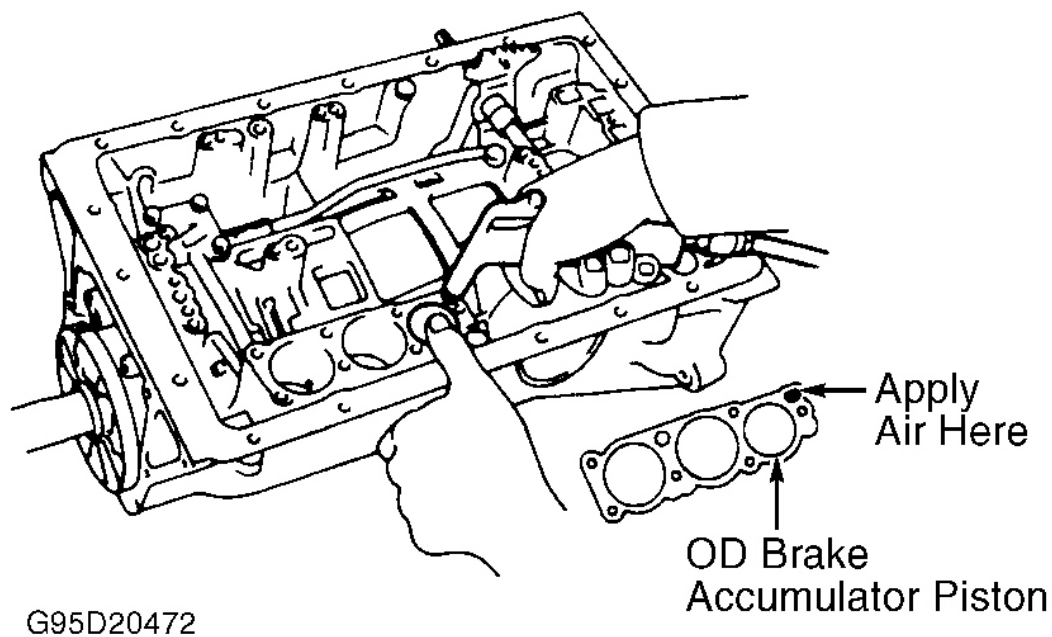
Removing OD Brake (B0) Accumulator Piston & Springs
